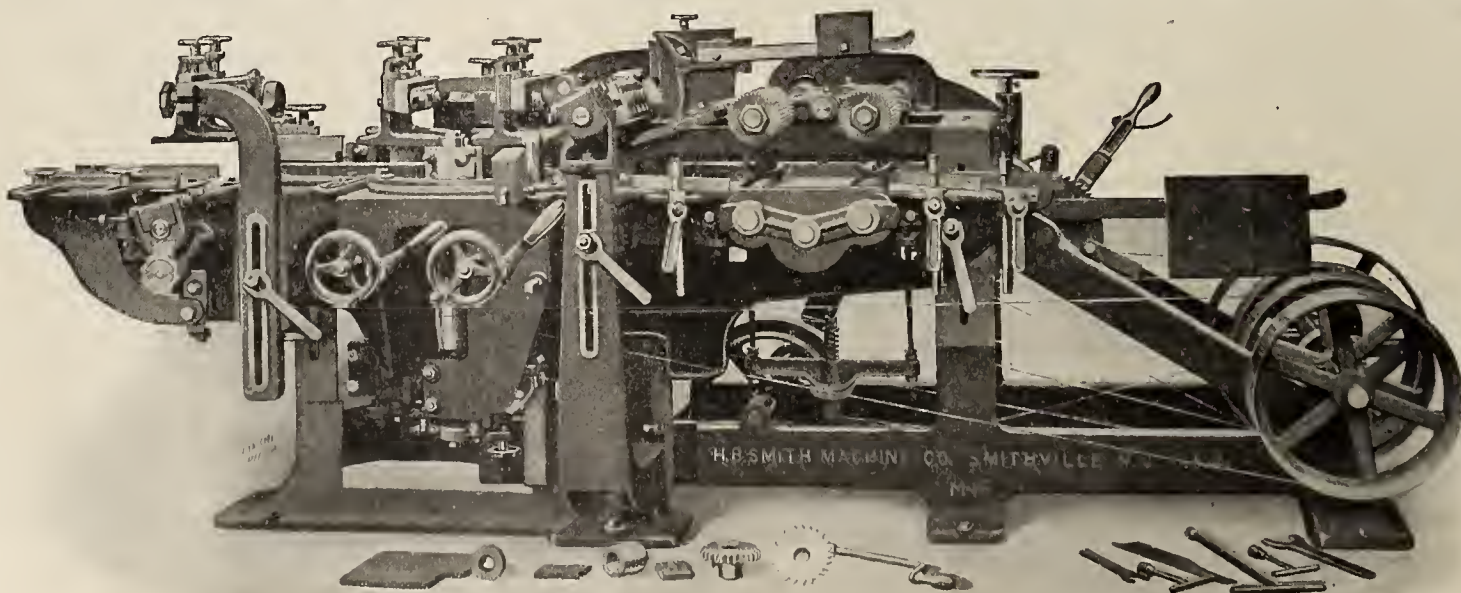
FRONT VIEW OF EXTRA HEAVY 10-IN. OUTSIDE MOULDER.
